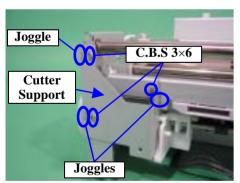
Reinstalling the Upper Housing Mounting Plate
